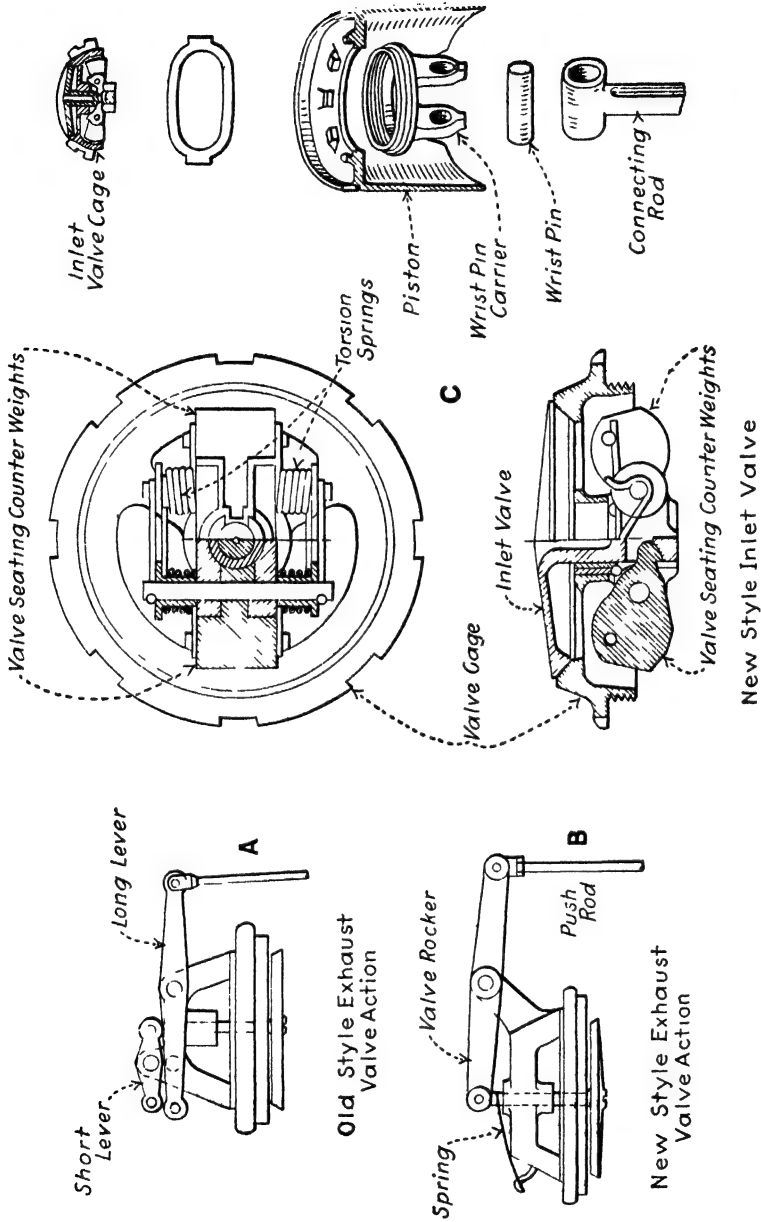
Details of Old Style Gnome Motor Inlet and Exhaust Valve Construction and Operation.
